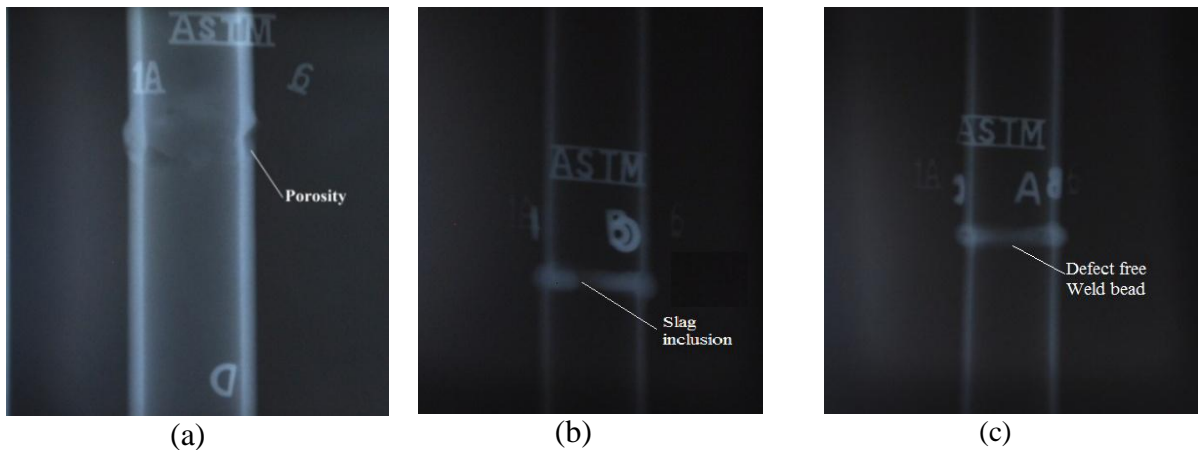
Weld bead images acquired under different loading conditions for optimized parameters
